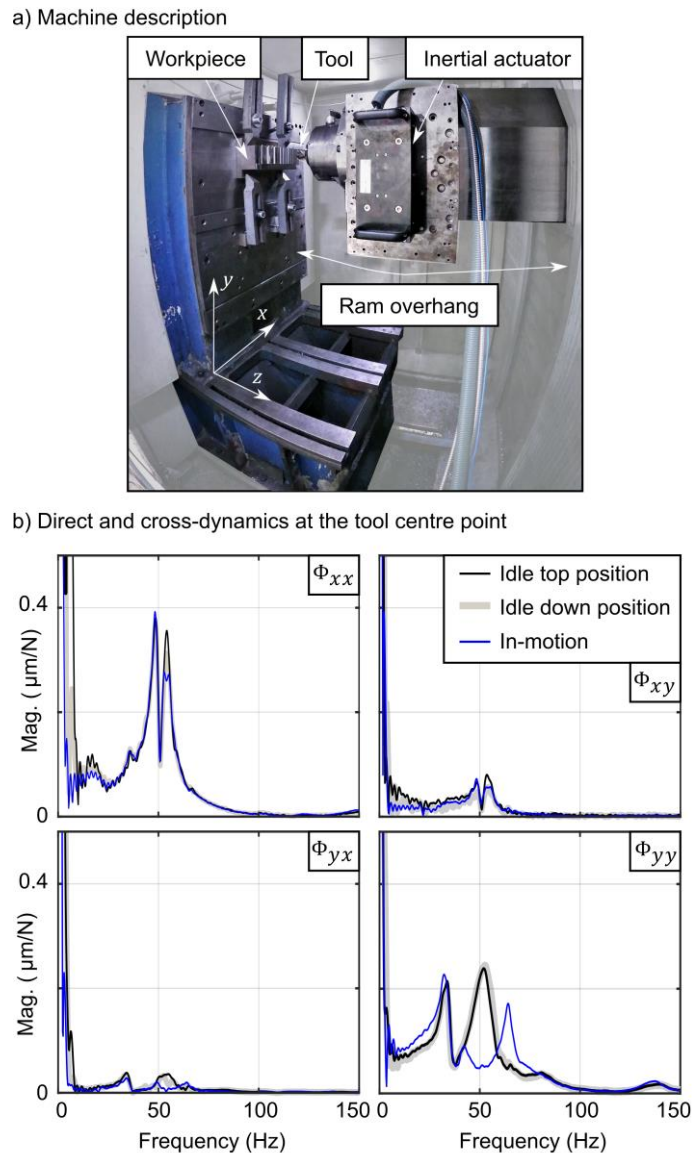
a) DS630 machine tool; b) Direct and cross-dynamics at the tool centre point.
